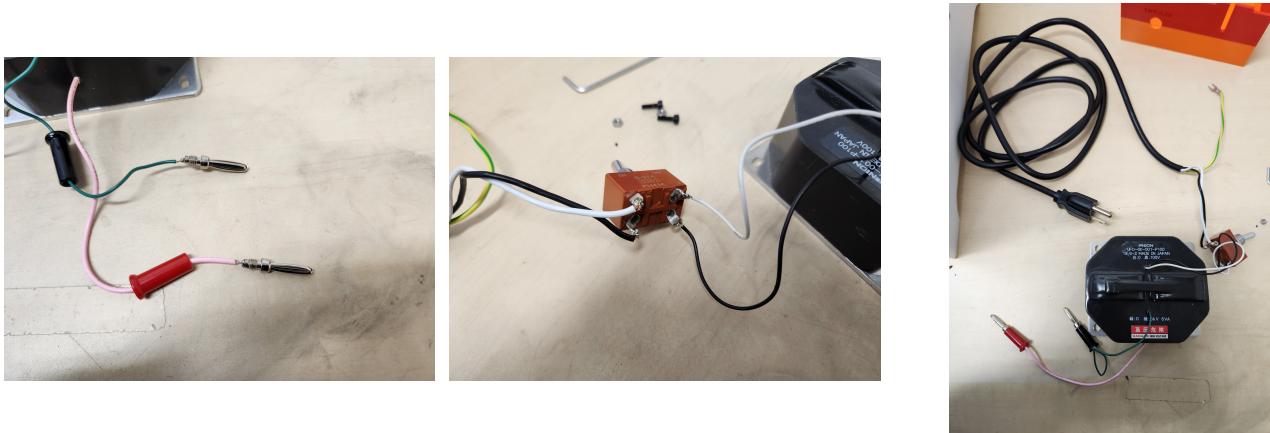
(left) soldering banana plugs, (center) soldering toggle switch (right) the finished product after soldering
